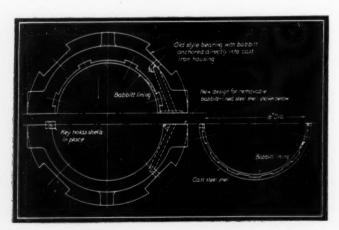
Babbitt-lined cast iron housing (upper) is now replaced by removable linertype in lower views
